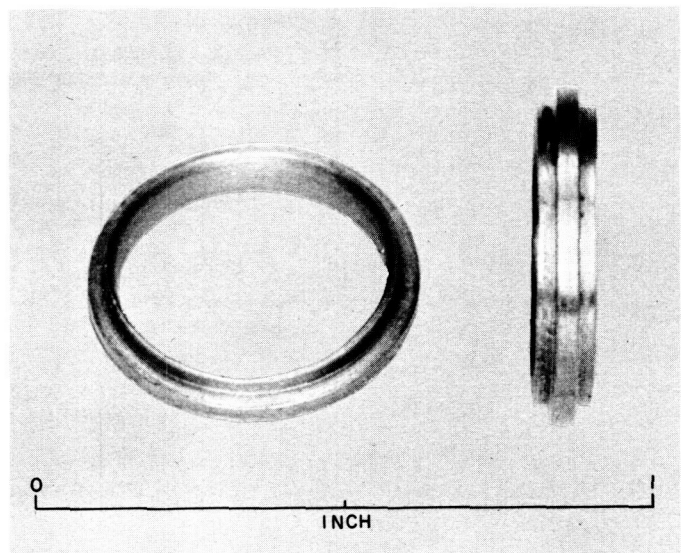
Cb-1Zr welding inserts for 1/8-in. tubing
